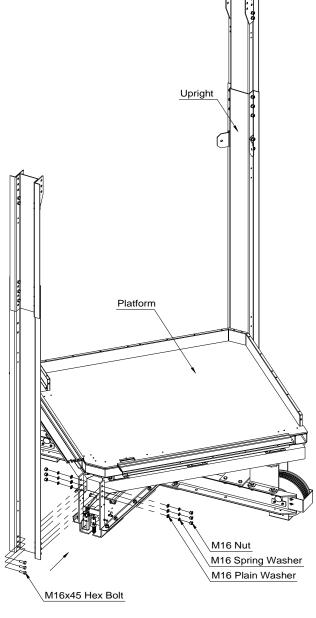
UPRIGHT INSTALLATION (Underslung Corner post type)
